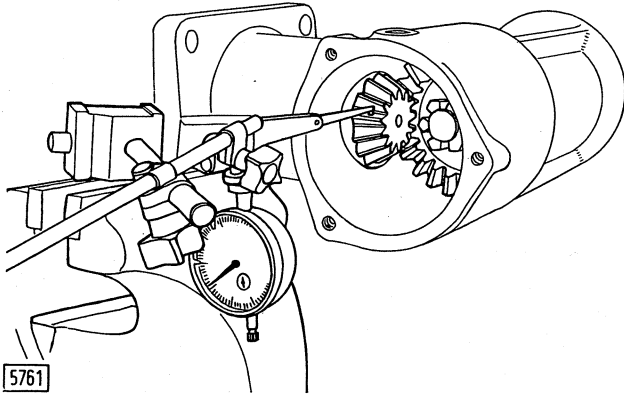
Tooth backlash of belt pulley bevel gear train.
